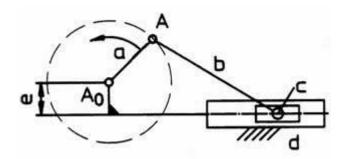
Slider crank mechanism with 1 sliding joint and 3 turning joints
